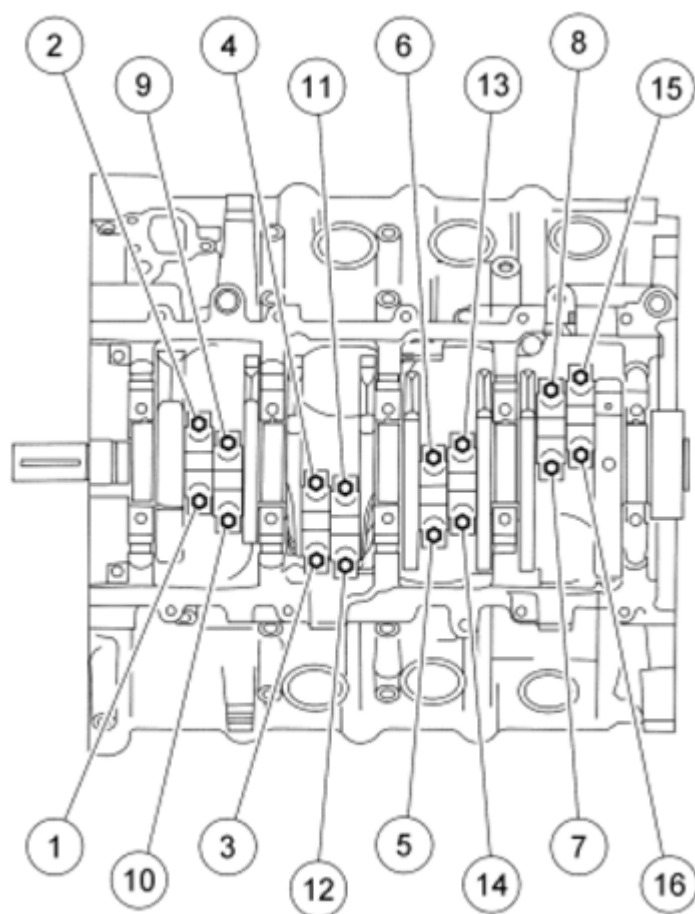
Locating Lower Bearing And Connecting Rod Cap Bolts
